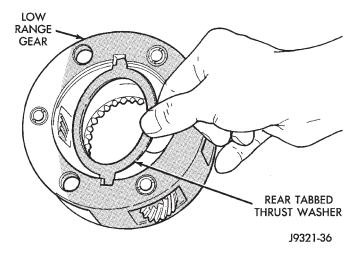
Rear Tabbed Thrust Washer Removal BEARING AND SEAL INSTALLATION
